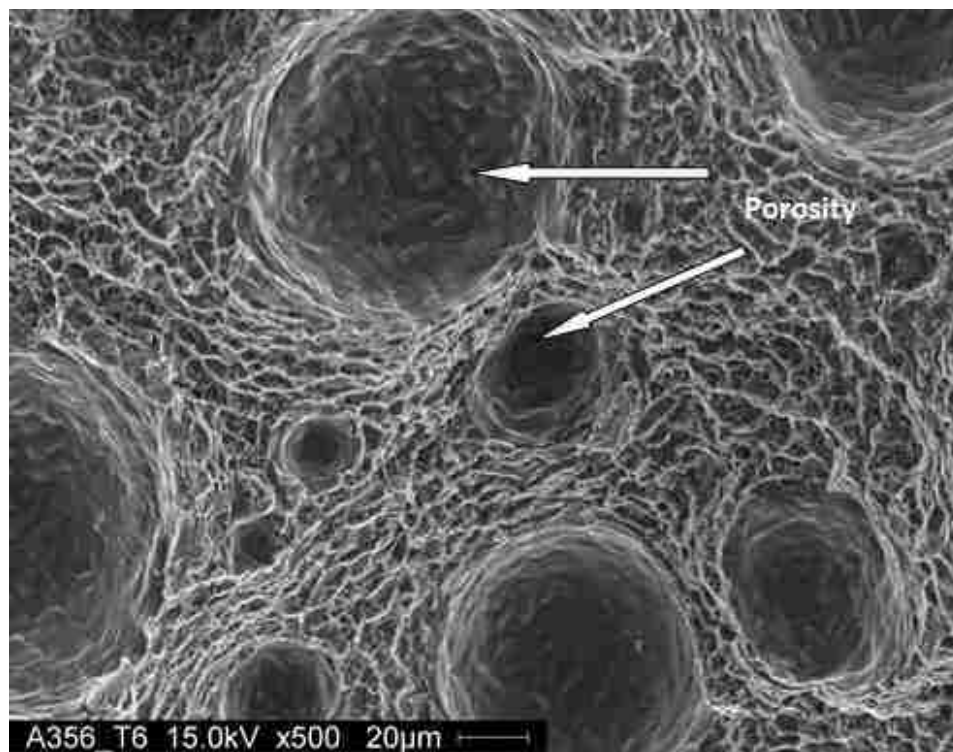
Fractograph of the tensile specimen of welded T6 cast alloy A356.
